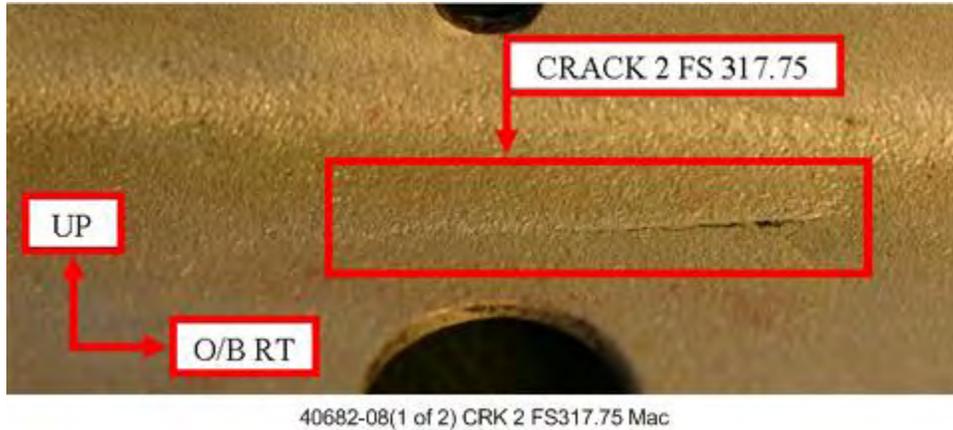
Macroscopic View of Crack 2 on the Aft Fuselage Bulkhead Assembly (1 of 2) FS 317.75
